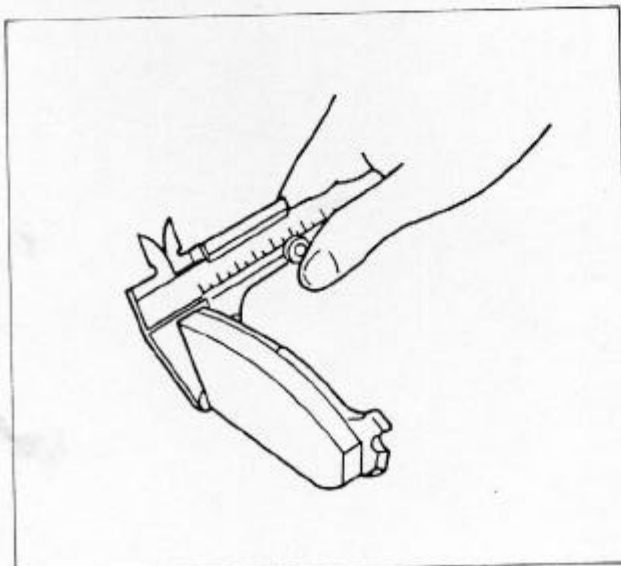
26 BRAKE PAD THICKNESS CHECK
